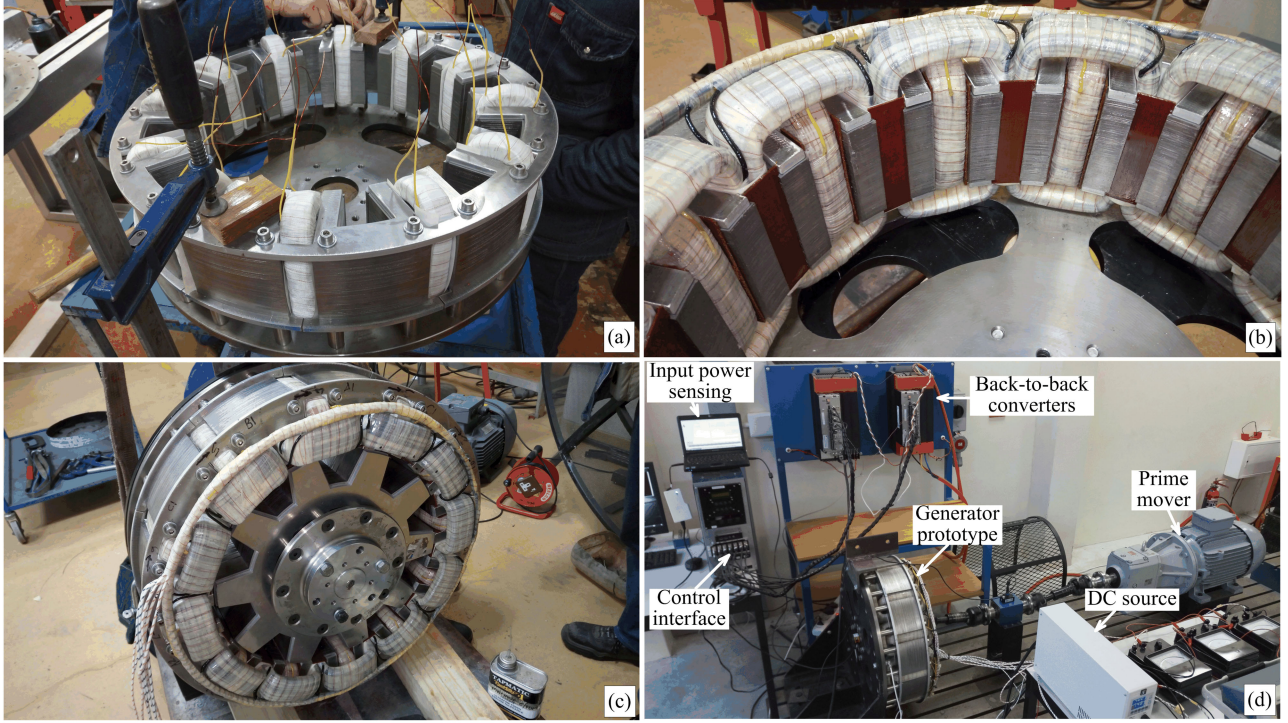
Prototype development and testing of 10 kW WF-FSM. (a) Manufacturing parts. (b) Varnished coils. (c) Assembled machine. (d) Experimental rig.
